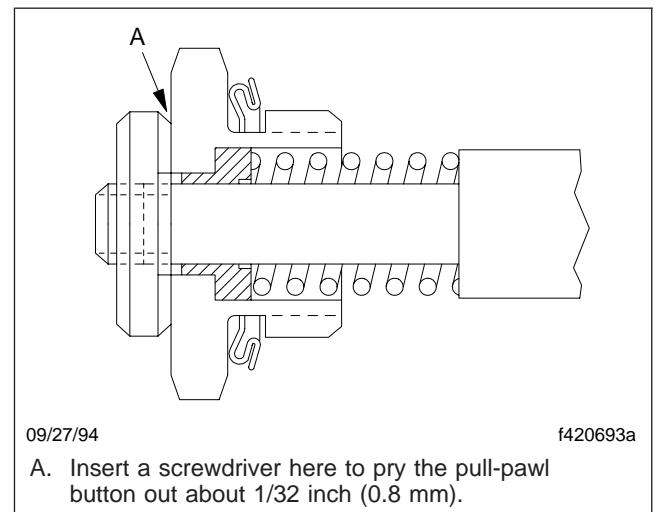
, Disengage the Pull-Pawl on Meritor Automatic Slack Adjusters
